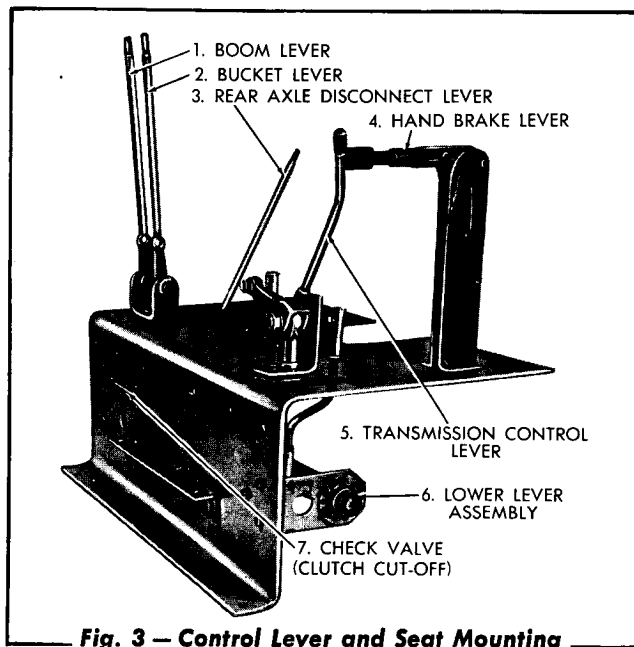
Control Lever and Seat Mounting Plate with Controls Attached
